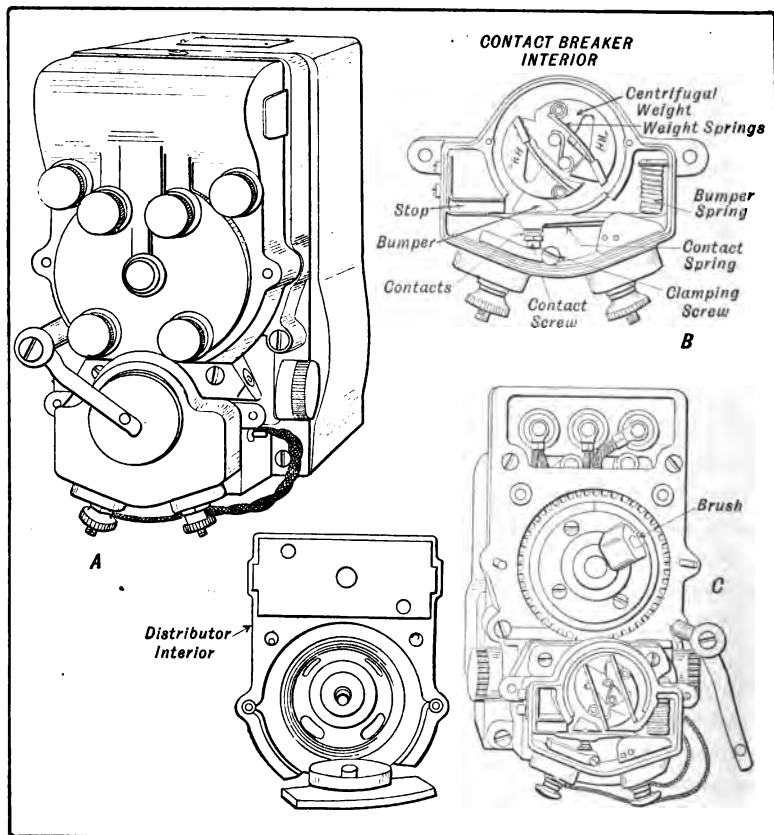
Showing Arrangement of Ignition Parts of Westinghouse Ignition Generator Unit.
